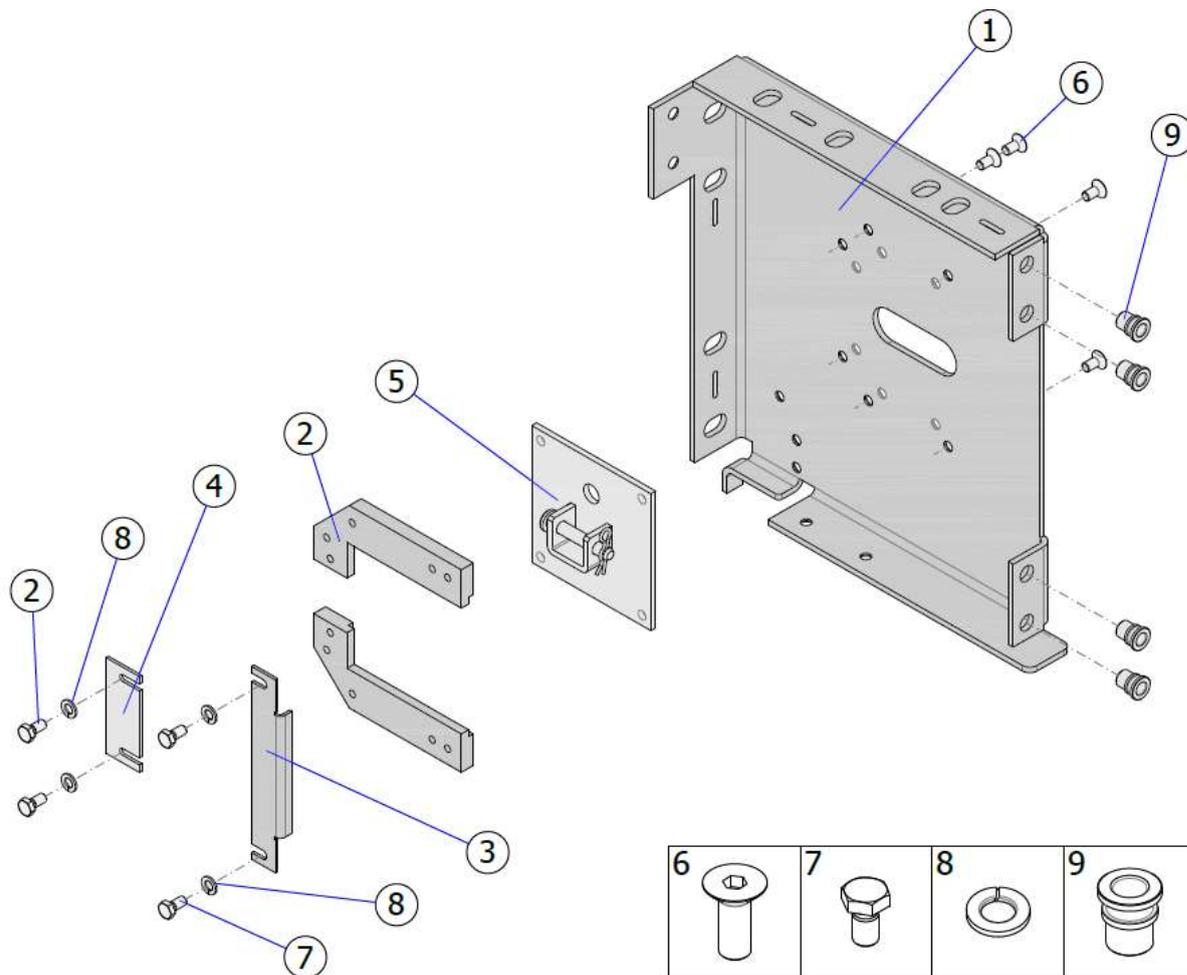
ISOiK-Ok60-01.23 [shaft bracket – drive side]
